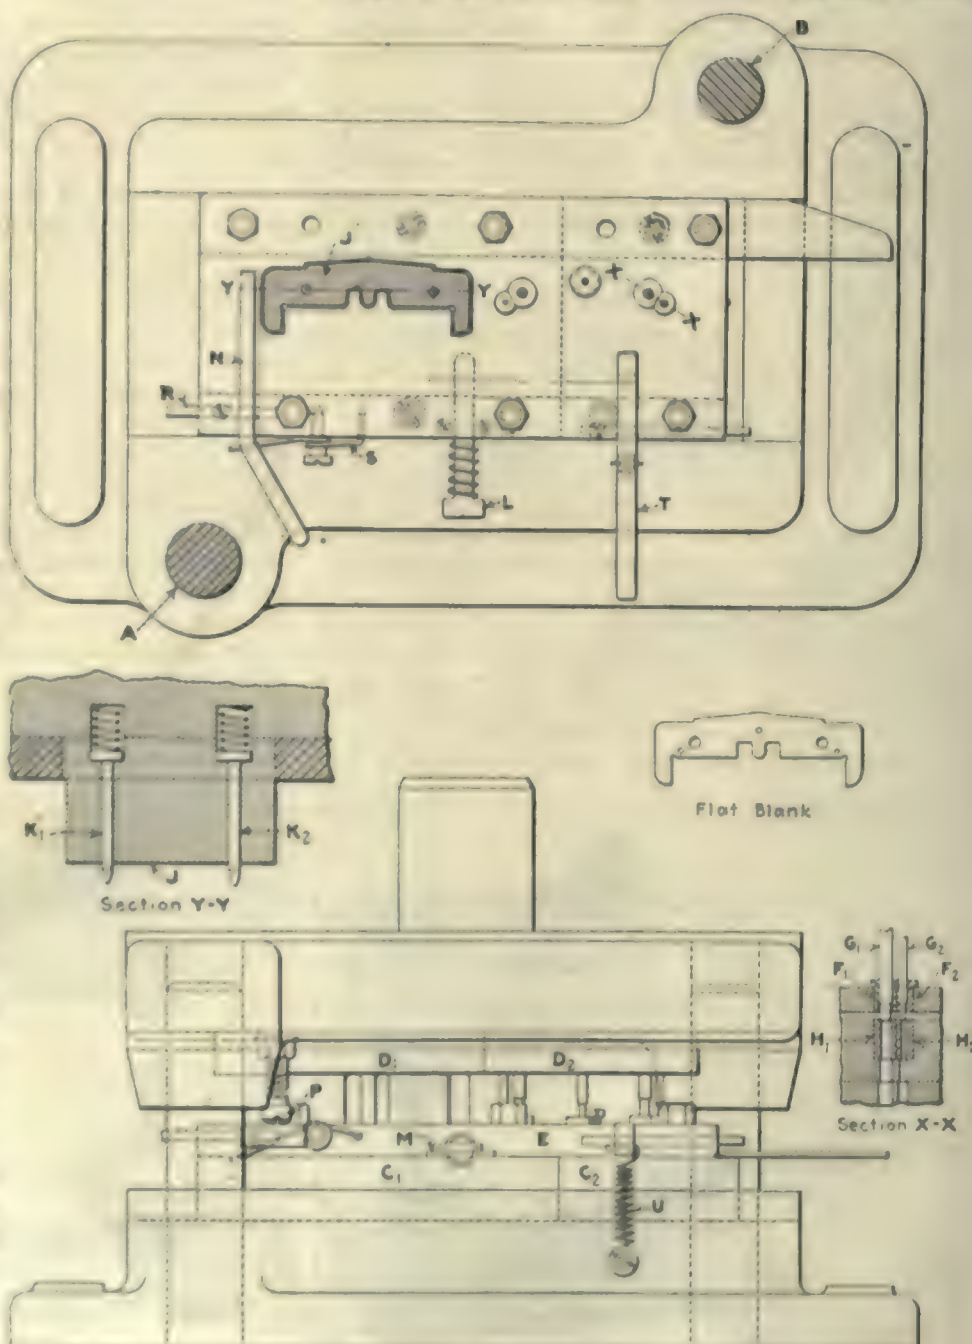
PLAN AND ELEVATION OF BLANKING AND PIERCING DIE
